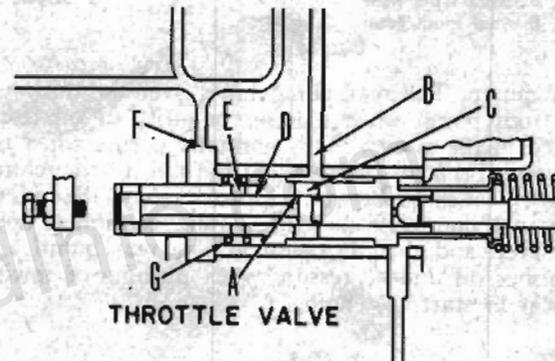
THROTTLE VALVE—COMBINATION MANUAL VALVE AND REGULATOR VALVE
